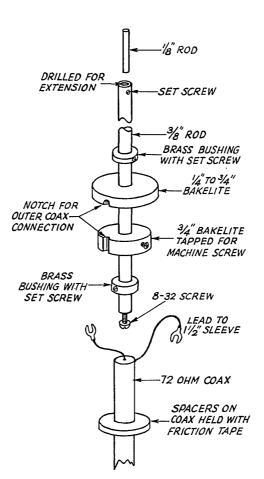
Exploded view showing the $\frac{3}{8}$ -inch rod and method of assembling the pieces.
